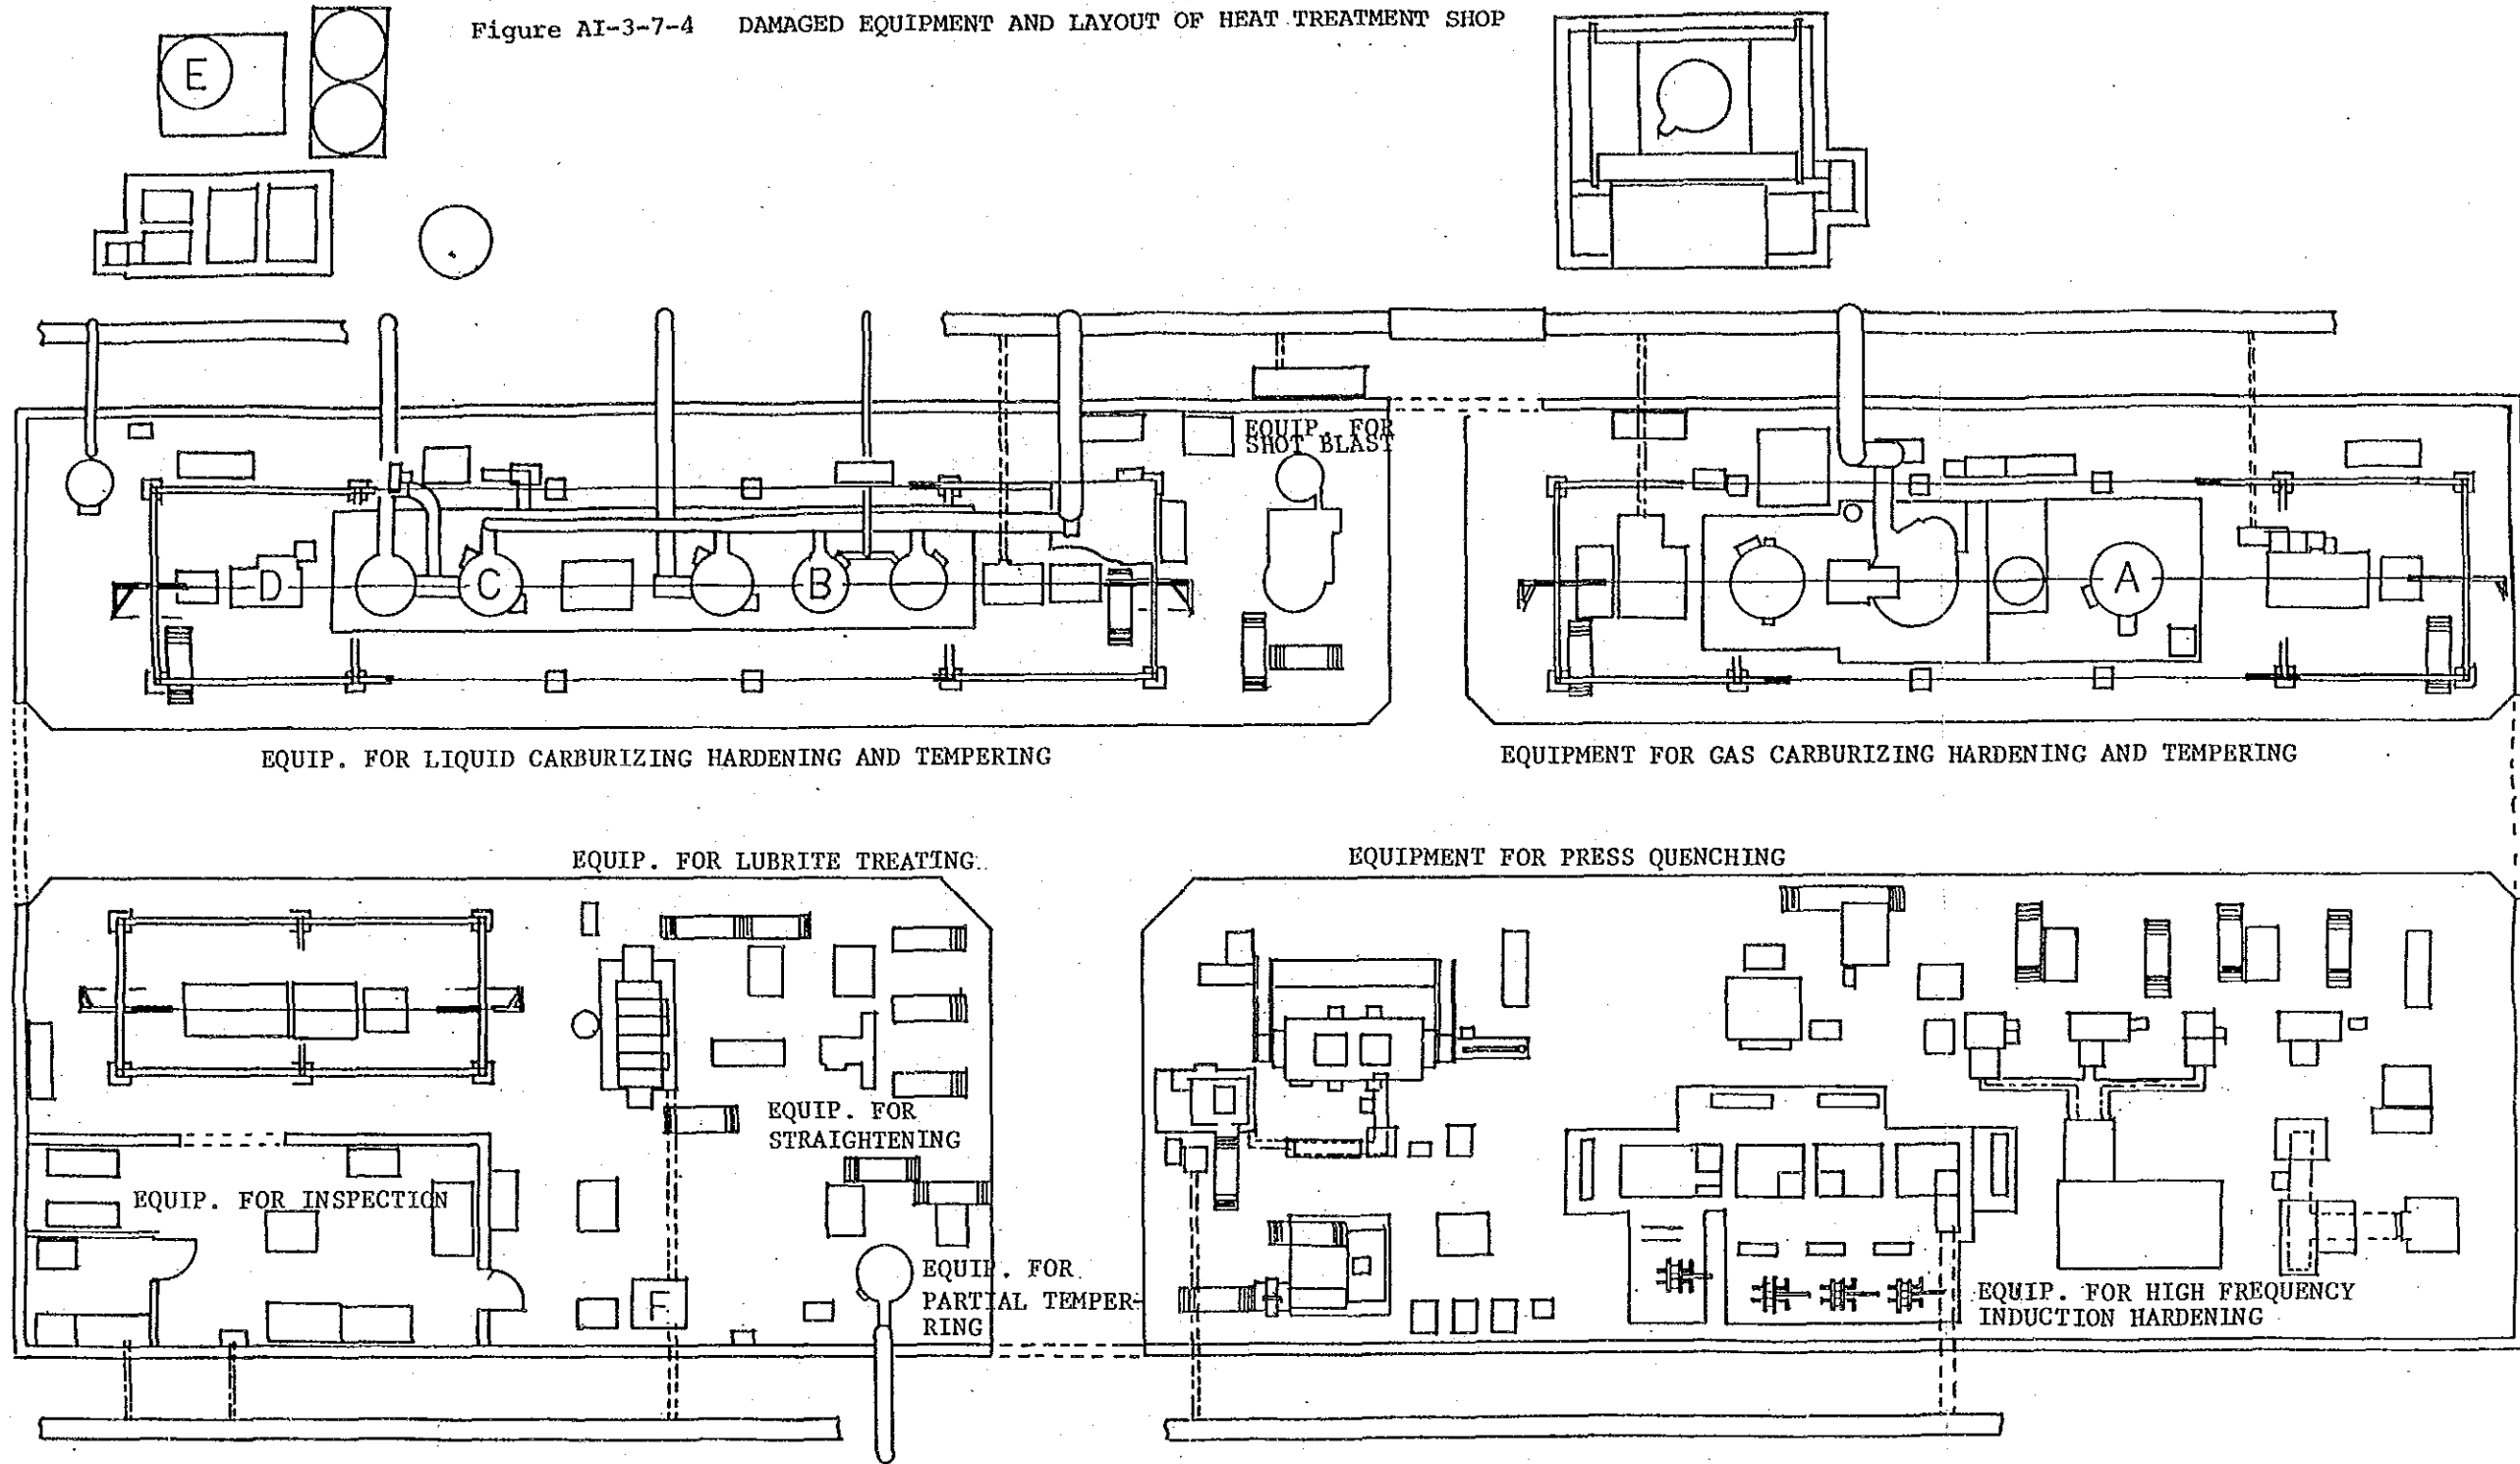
DAMAGED EQUIPMENT AND LAYOUT OF HEAT TREATMENT SHOP
